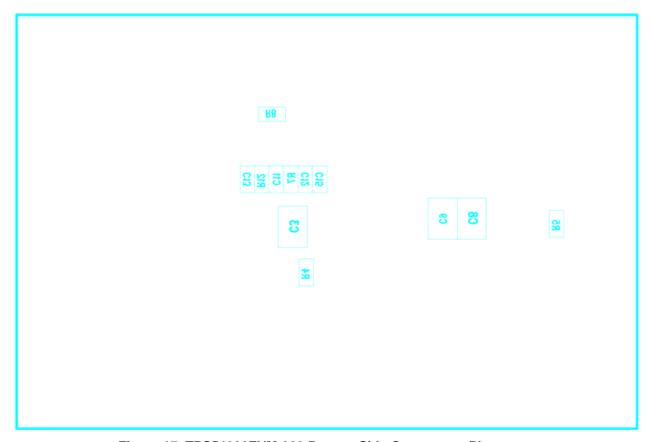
TPS54020EVM-082 Bottom Side Component Placement
